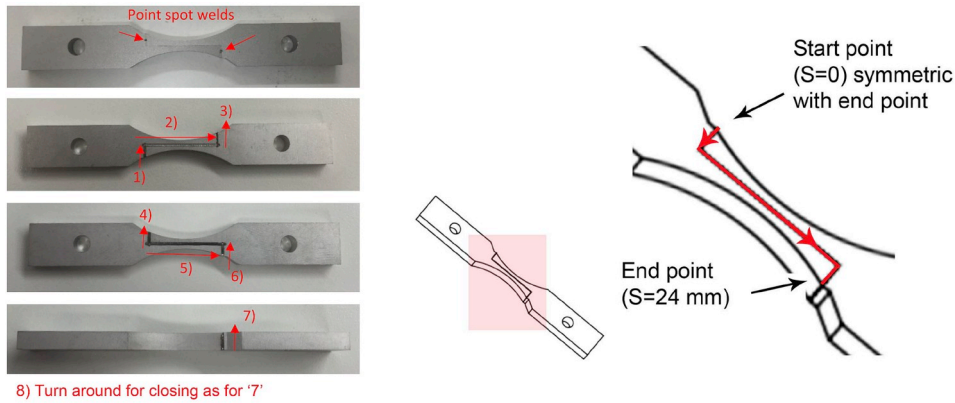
The welding procedure for GE1 and GE2 specimens and the definition of the S-coordinate along the weld line for both GE specimens.
